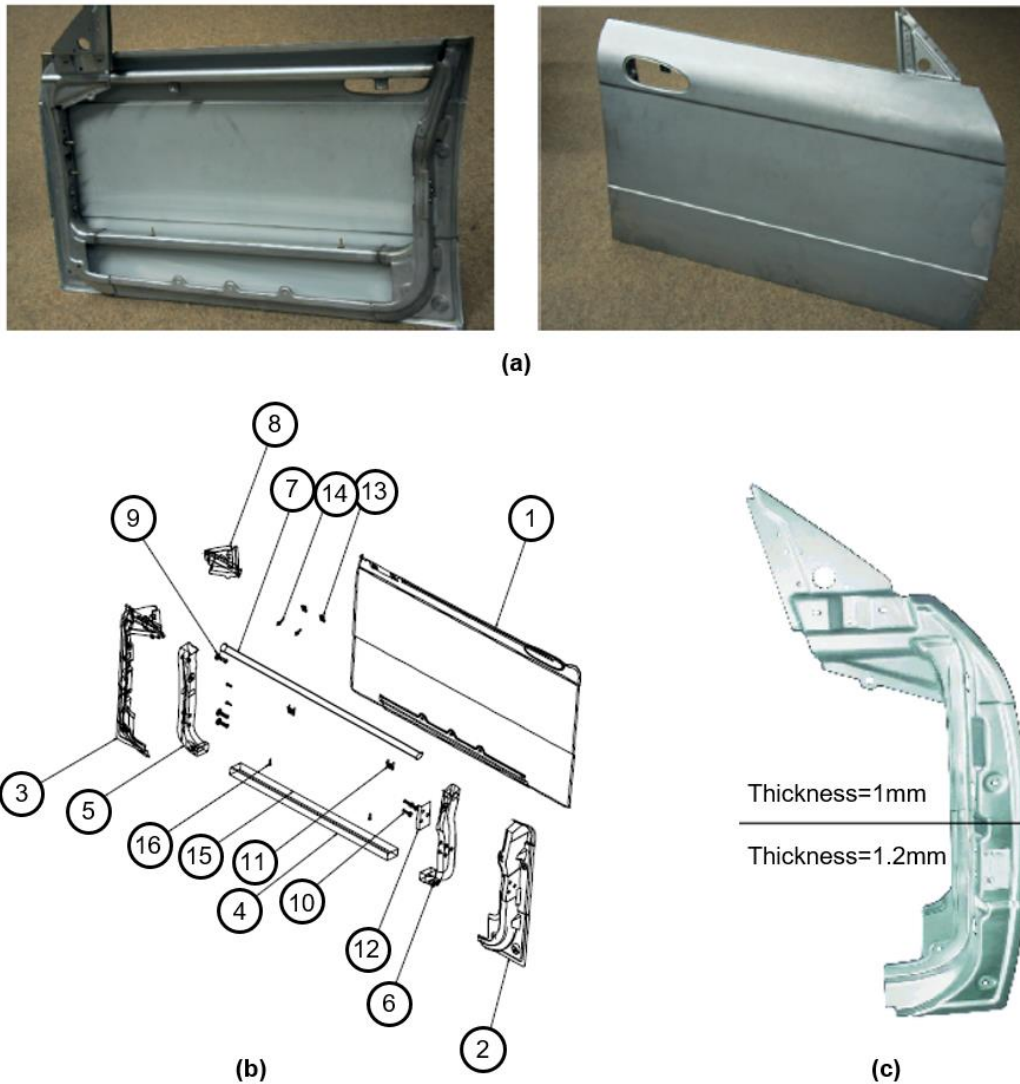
ULSAC door: hardware (a); explosion view (b); laser-welded tailored blank (c) [87]
